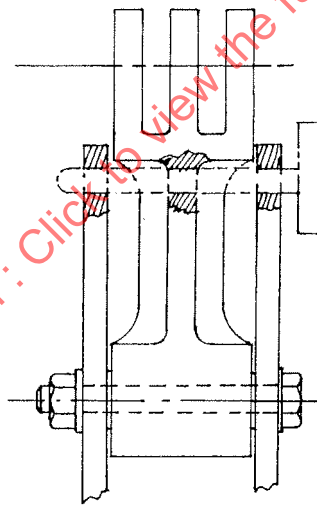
DOUBLE SHEAR RIGGING PIN INSTALLATION - GOOD DESIGN
